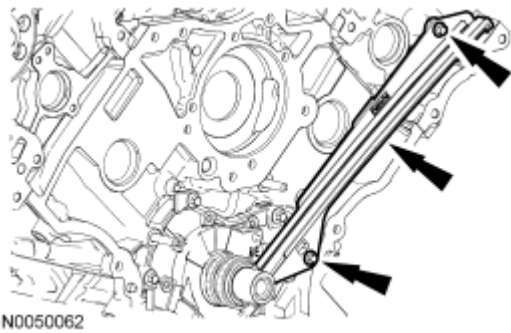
Locating LH Primary Timing Chain Guide Bolts
